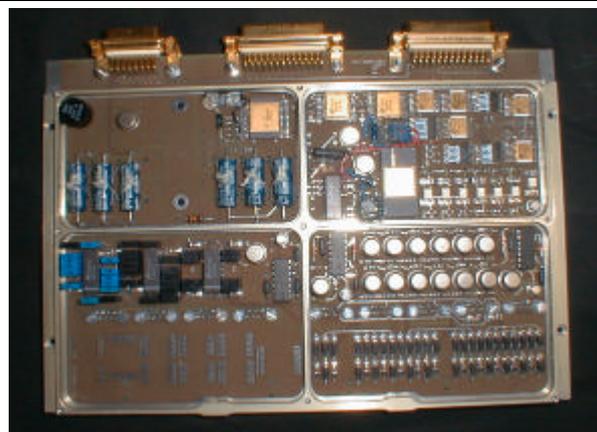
GFCU PCB dedicated the command/ control of the GFCU operation
